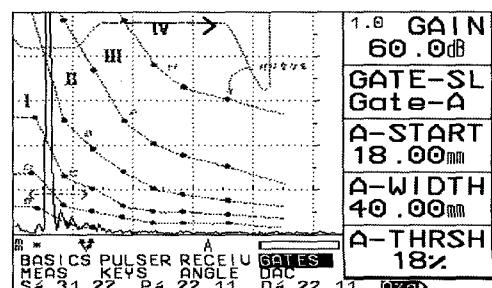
Ultrasonics signal of rail weld zone(head part)
